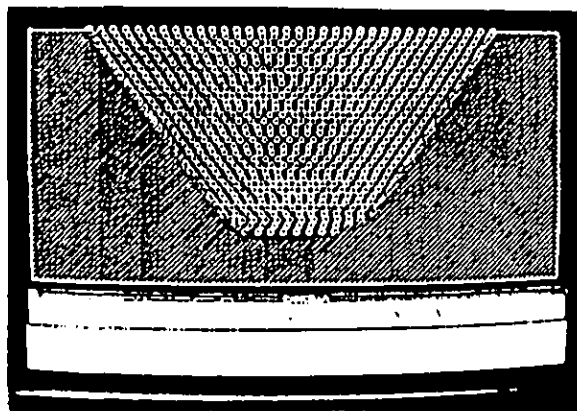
LASER WELDING PROGRAM FOR THE SPECIMEN
